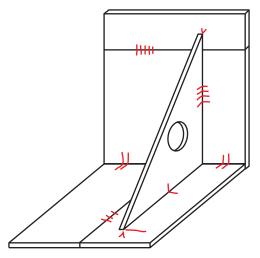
Lay out markings to help locate the parts for tack welding.
